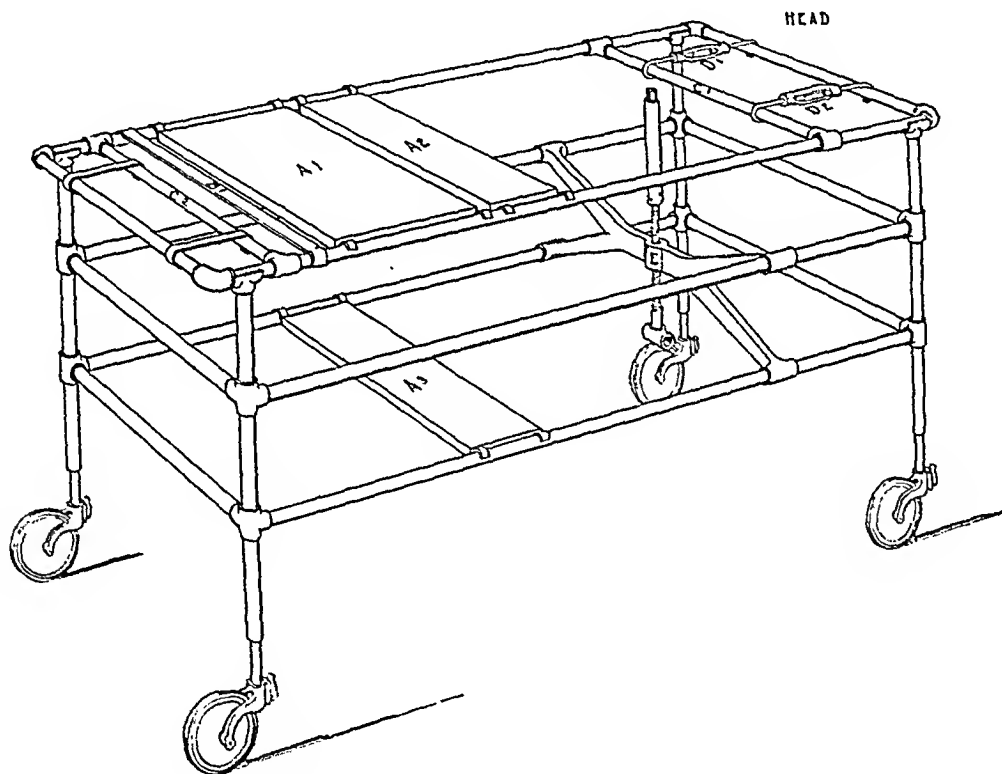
Fracture table. A1, A2, A3, removable top boards. B1, one of the narrow cross-pieces of which there should be four or five. C1, C2, hammock bars. D1, D2, turnbuckles for controlling hammock tension. E, the underslung support shown in the shoulder position (note that it is adjustable as to height by the screw). A flat sheet of steel not shown here rests between the turnbuckles and when in use supports the patient's head.
